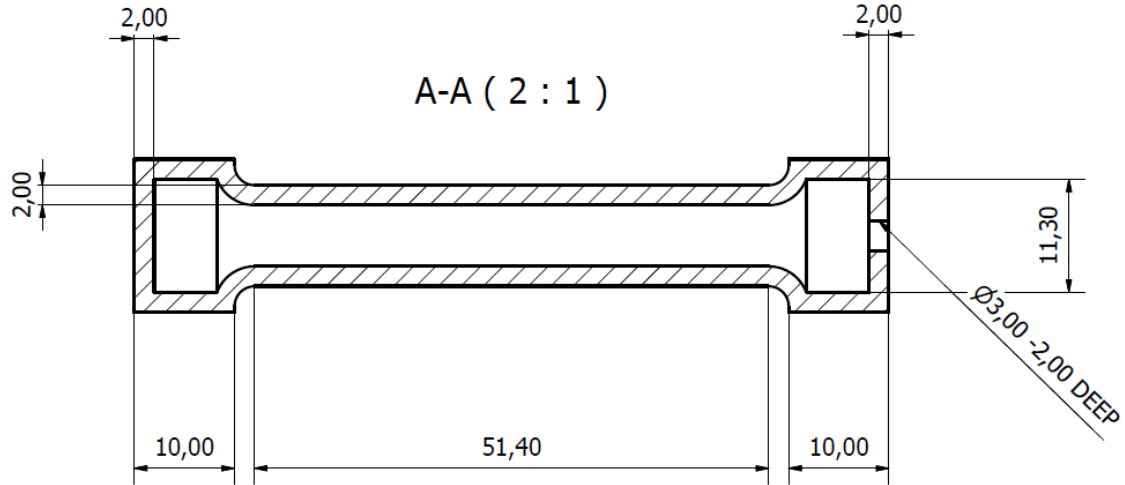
Tensile test specimens drawing with shell and open hollow structure with 2mm section thickness
